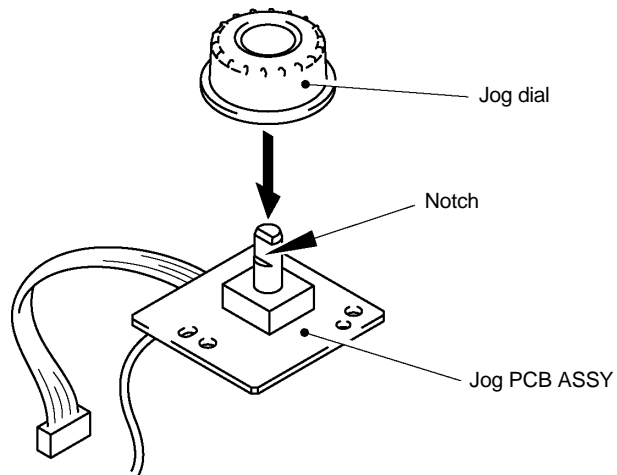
Reassembling the KB Unit/Rubber Key Unit (5)
